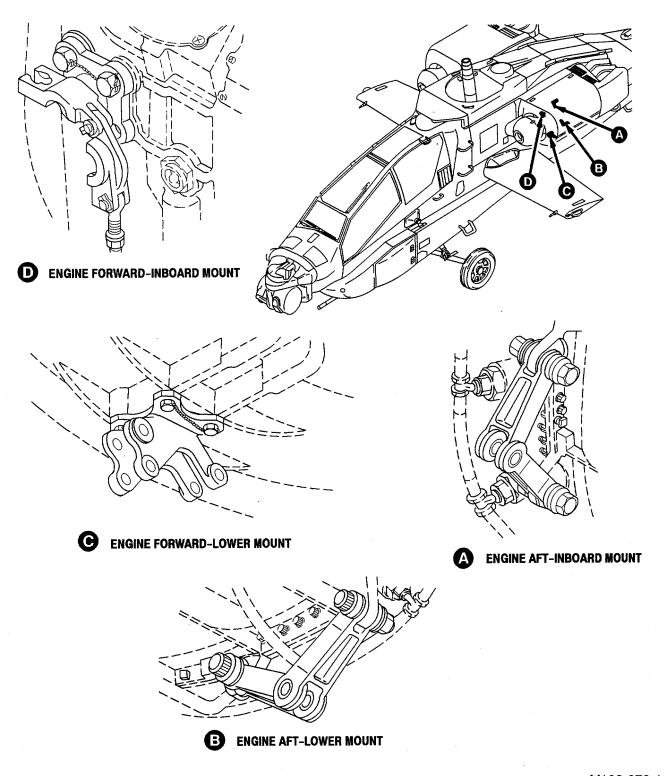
Power Plant Installation Component Location (Sheet 1 of 2)
